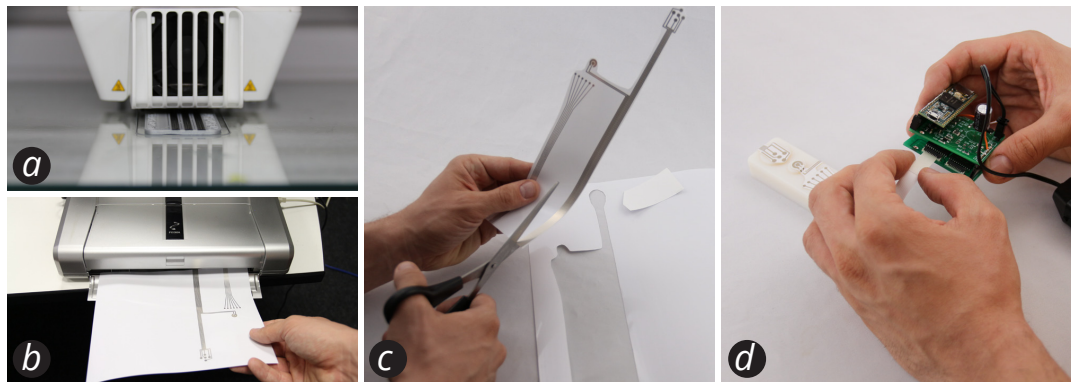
Rapid fabrication example: The designer prints the physical prototype on a 3D printer (a). Alternatively, she prints the interface on a conductive inkjet printer (b), cuts it out (c), and attaches it. Finally, the prototype is connected to the Tactlets controller (d). The entire fabrication (b-d) of the presenter prototype takes less than 5 minutes.
